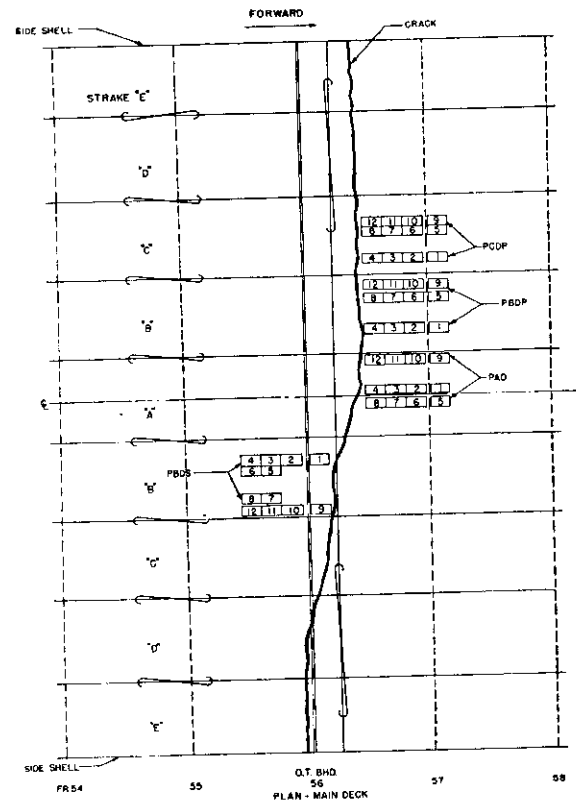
Ponaganset—Plan view of main deck showing the location of test specimens
